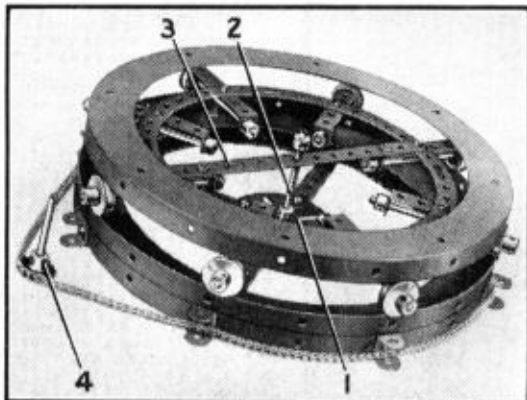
An arrangement for a large built up roller type bearing. A device of this kind is suitable for use in large hammerhead and blocksetting cranes.
